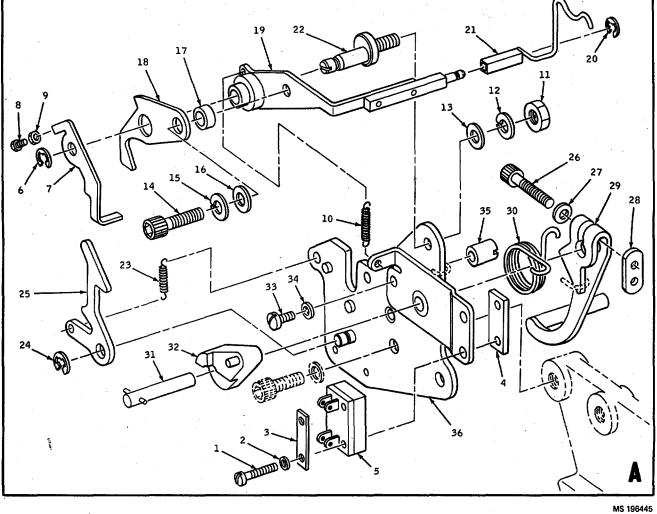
Low Paper Alarm Assembly, Exploded View (Sheet 2 of 2)
